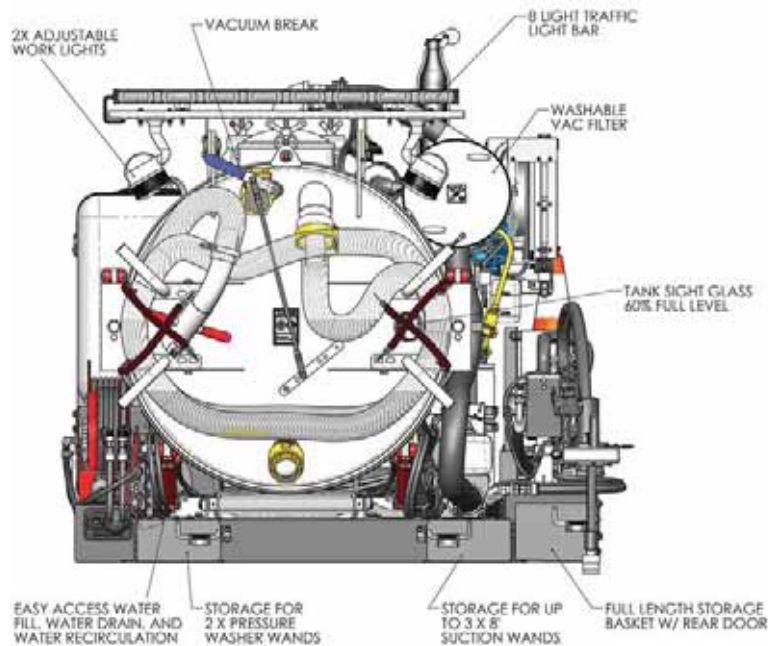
The drawing shows the rear view of the SB VMS (both engine configurations).
